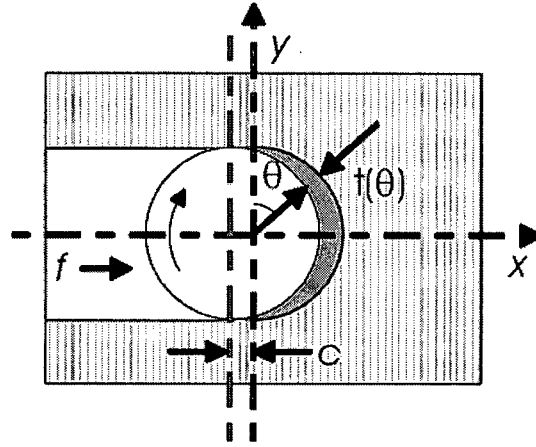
Chip thickness in full immersion milling: $t(\theta) = c \sin(\theta)$.
